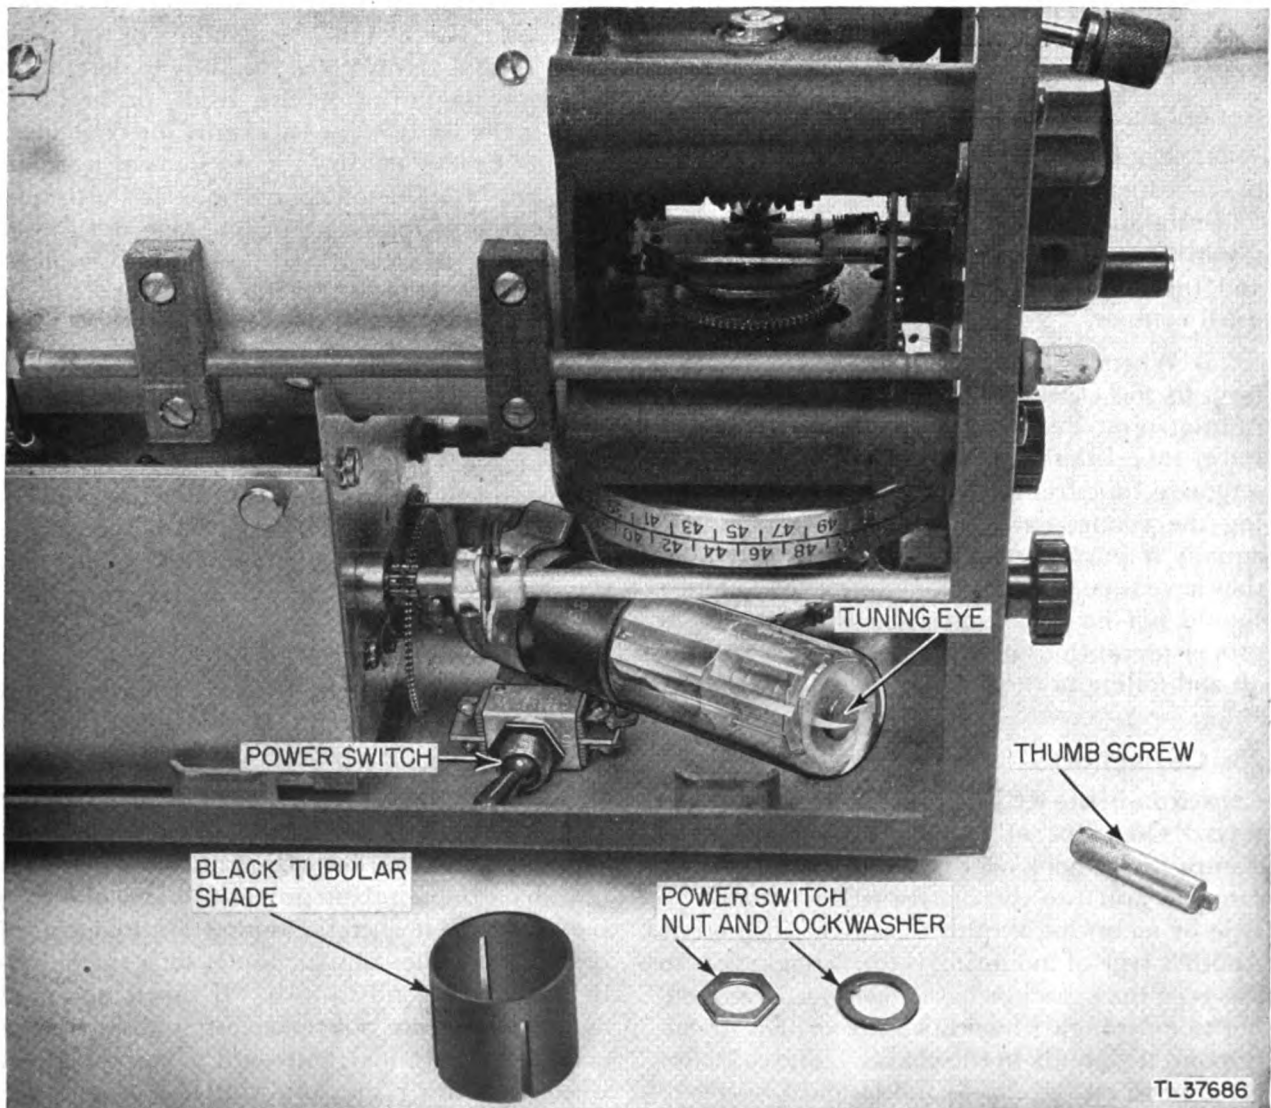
Front assembly of wavemeter with tuning indicator tube about to be removed.
